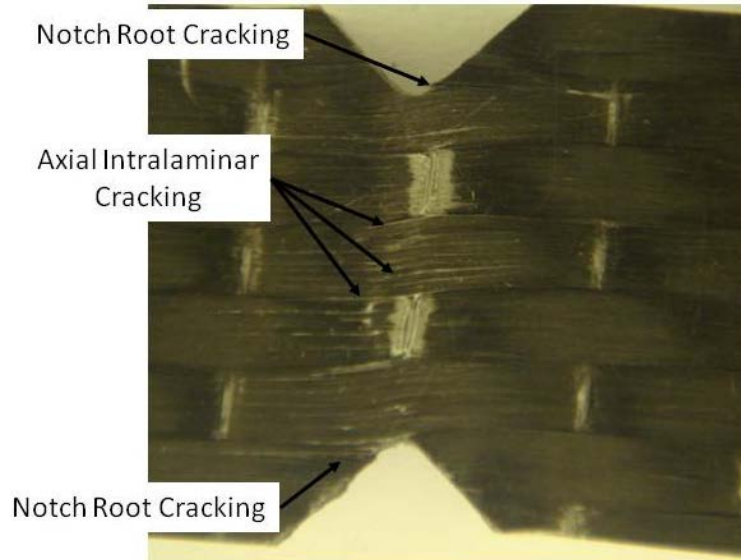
Failed Iosipescu dry C(G)/VE 510A specimen showing notch root cracking and axial intralaminar cracking.
